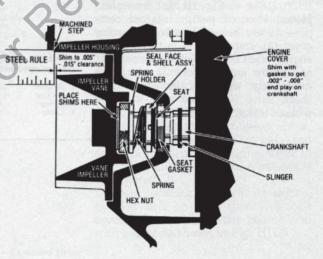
Gap between impeller and wear plate recess in impeller housing of Models 123TP4, 160TP4-1, 160TP4-1A, 160TP4-1B and DTP4-1 should be 0.005-0.015 inch. Refer to text.
